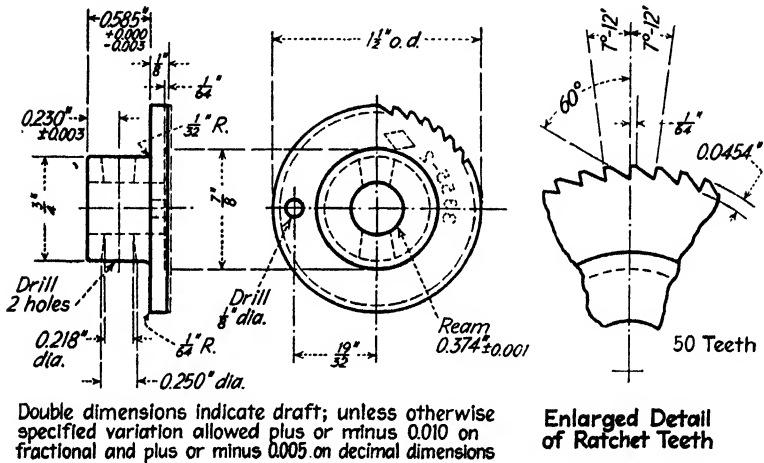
Die-cast ratchet wheel that cost much less in this form than when produced on the screw machine with teeth milled subsequently.
